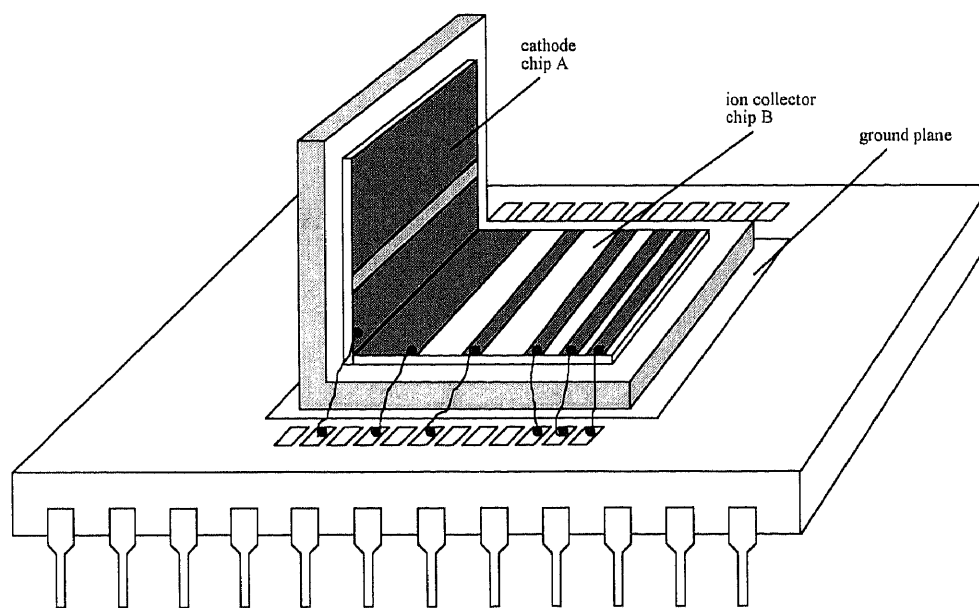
Assembled device in a 24-pin DIP package with ground plane
